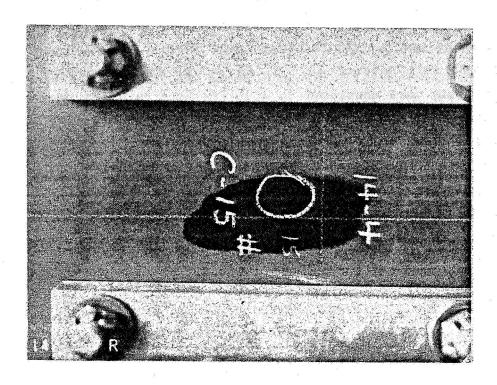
Impact Side Leakage of 47-Ply AS4/3502 Panel Impacted at 25 Ft.-Lb. at Approximately Zero Fuel Pressure.
